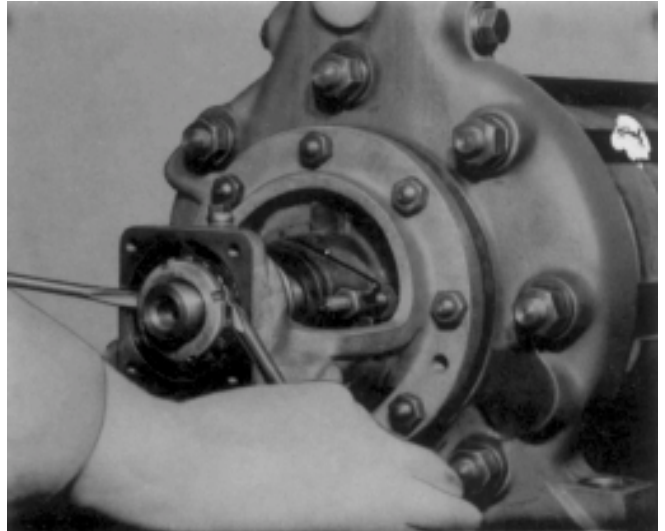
Forcing out the inner components of the cylindrical roller bearing.
